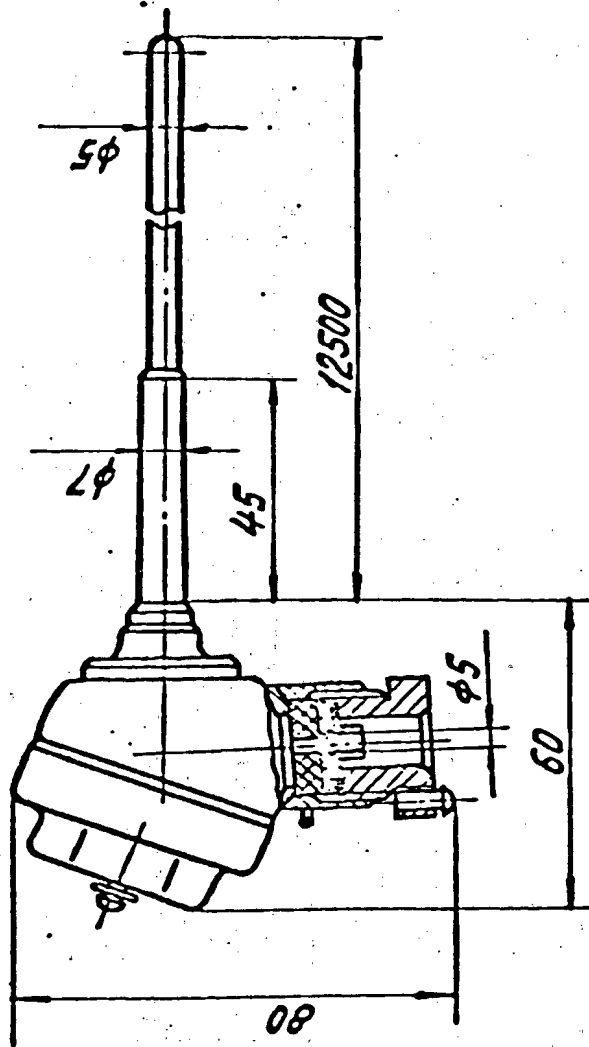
Outline drawing of headed Chromel-Alumel cable-type thermocouple.
